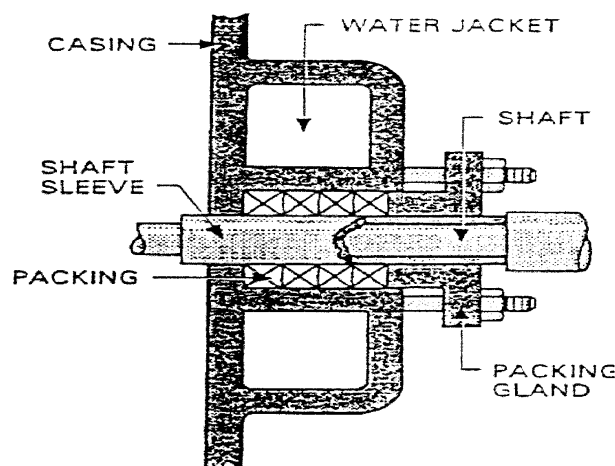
A diagram showing the water jacket used for pump cooling.
